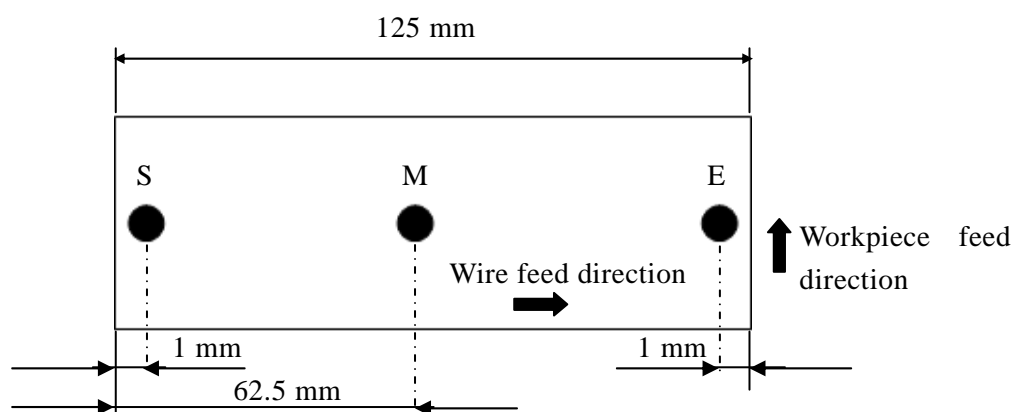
Cross section of workpiece showing measurement points of surface roughness: (S) wire entrance side, (M) middle part, (E) wire exit side
